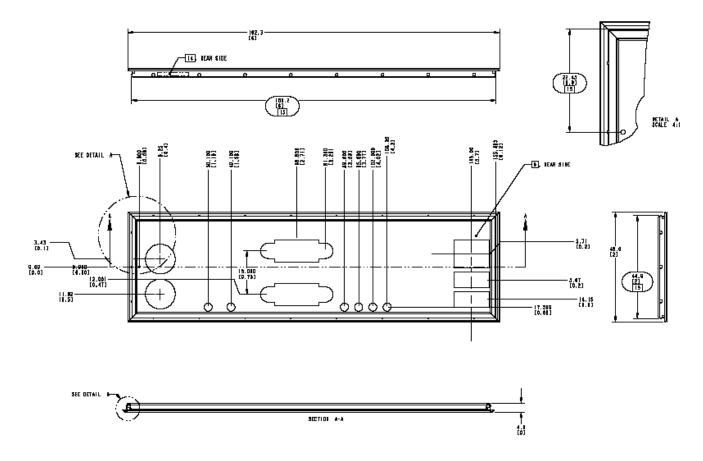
Pedestal Mount I/O Shield Mechanical Drawing for Intel[®] Server Board S3000AHV
